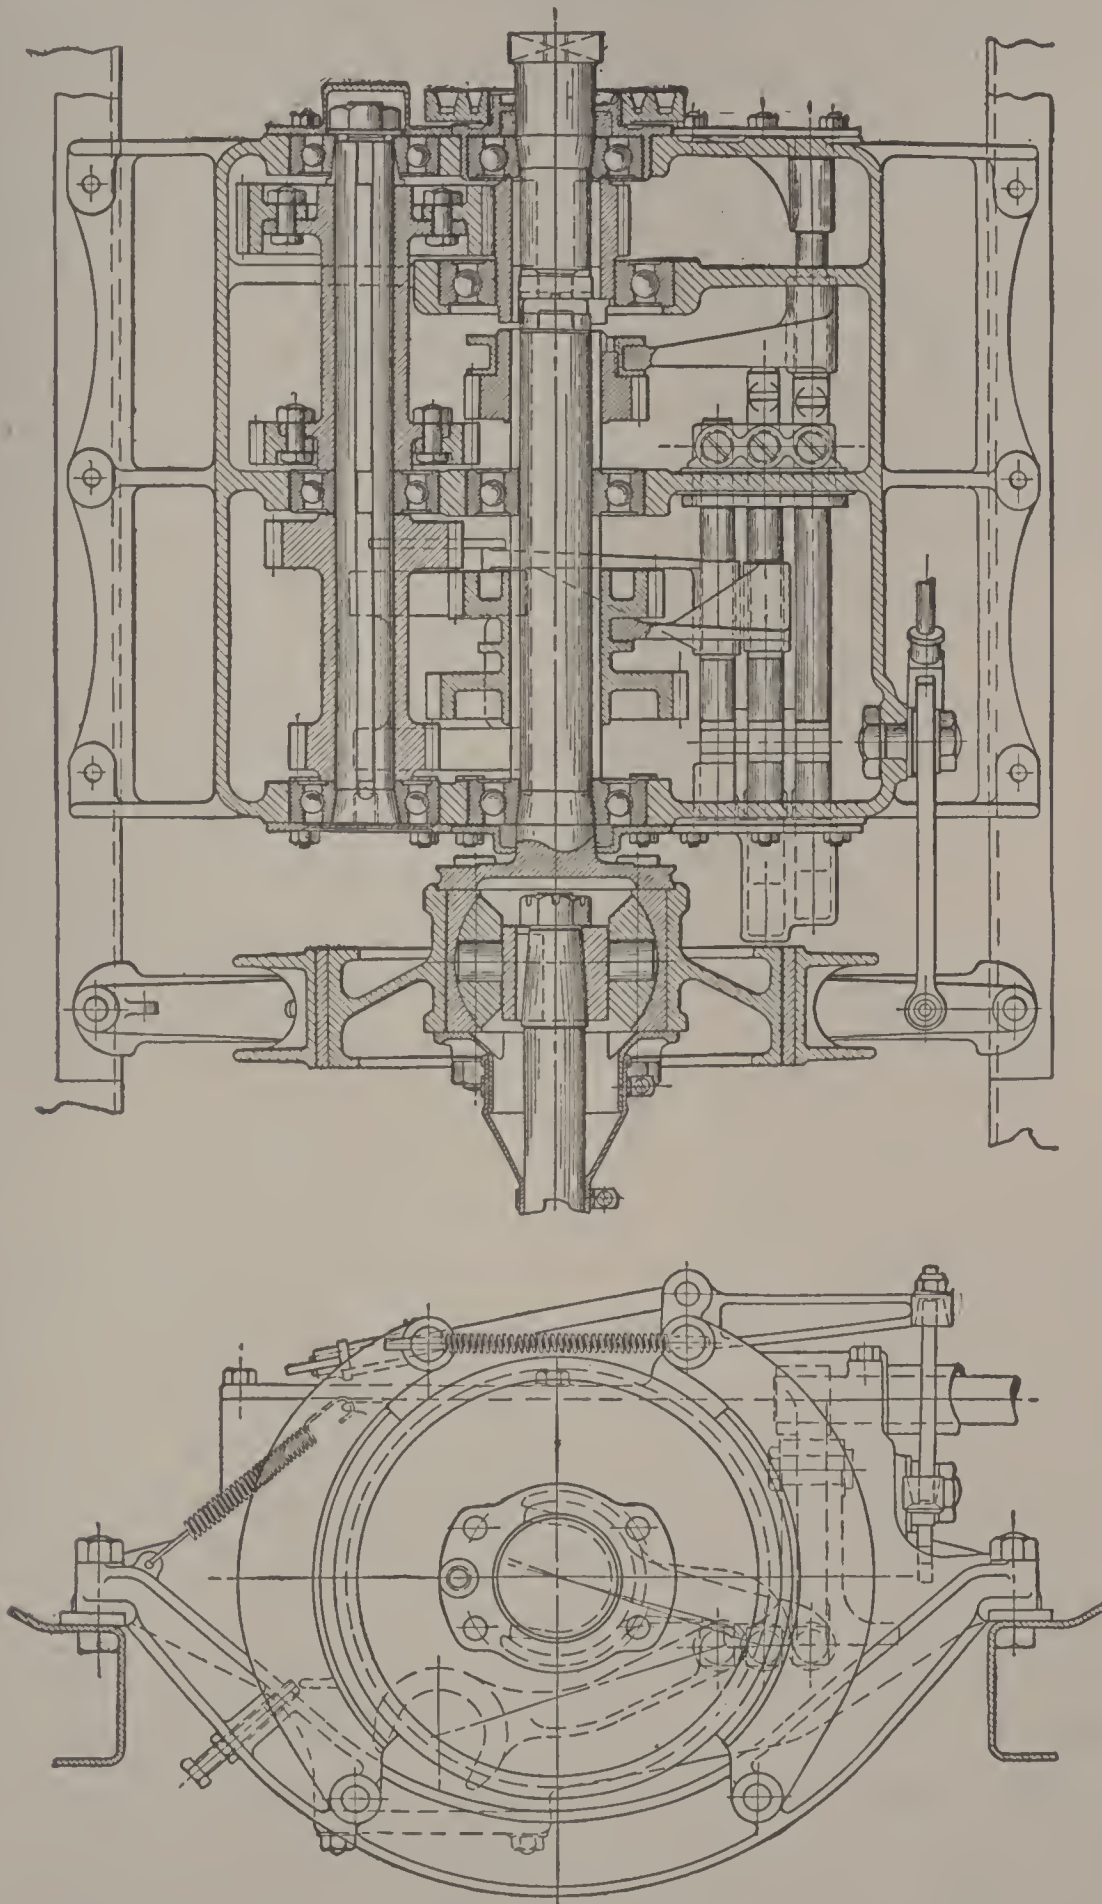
Four-Speed Gear Box and Shaft Brake of Austin (English) Car
